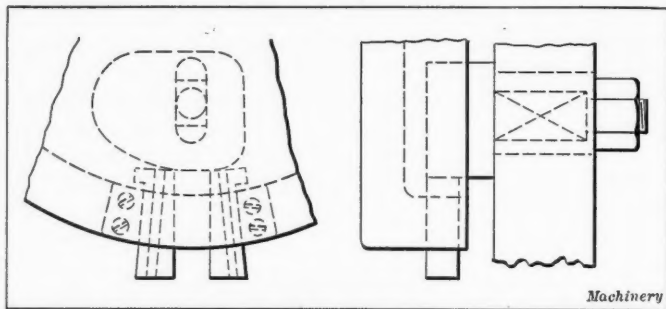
Special Clamping Mechanism which ejects through Engagement of the Wedges with a Dog
